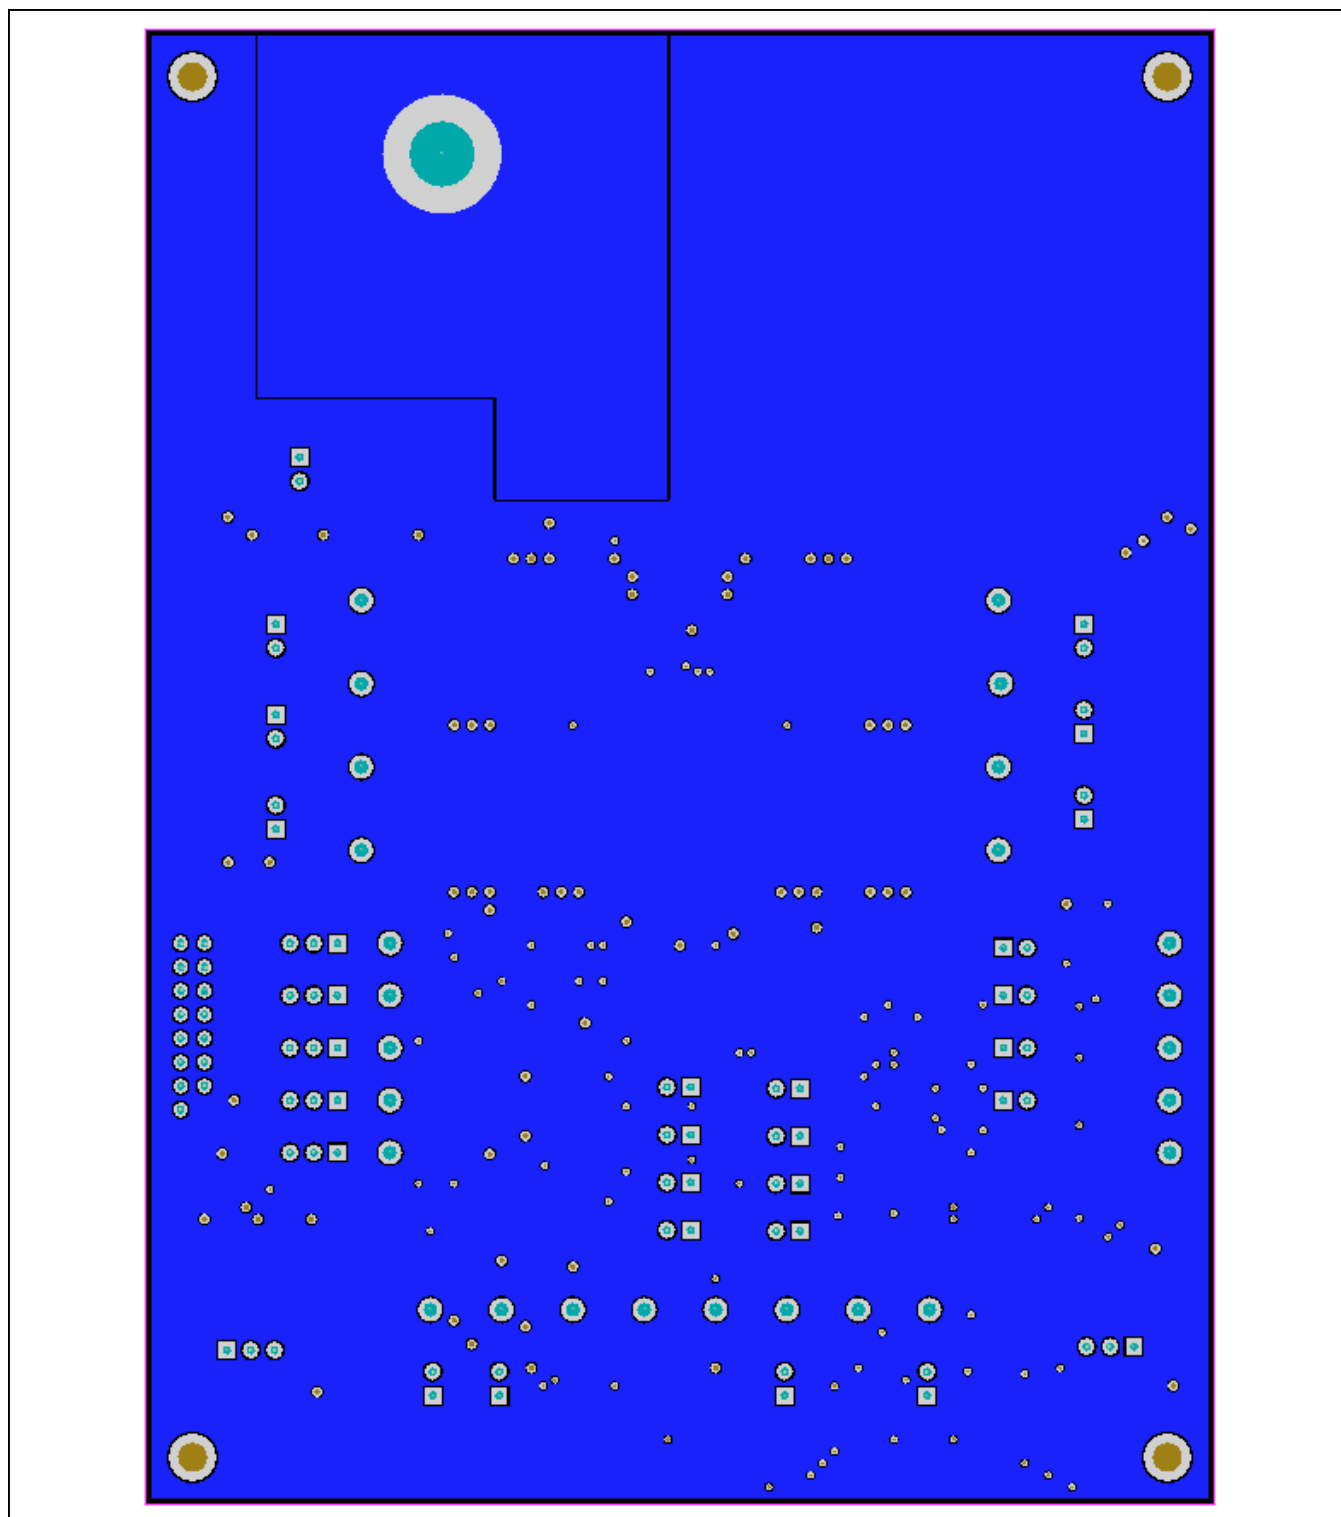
MAX14900E EV Kit Component Placement Guide—Bottom Layer
